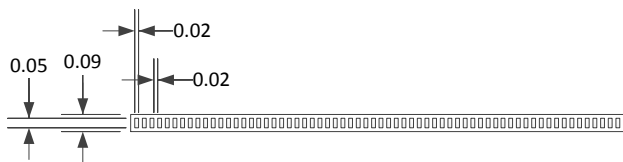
Cold Plate with parallel channels (dimensions in inches).
